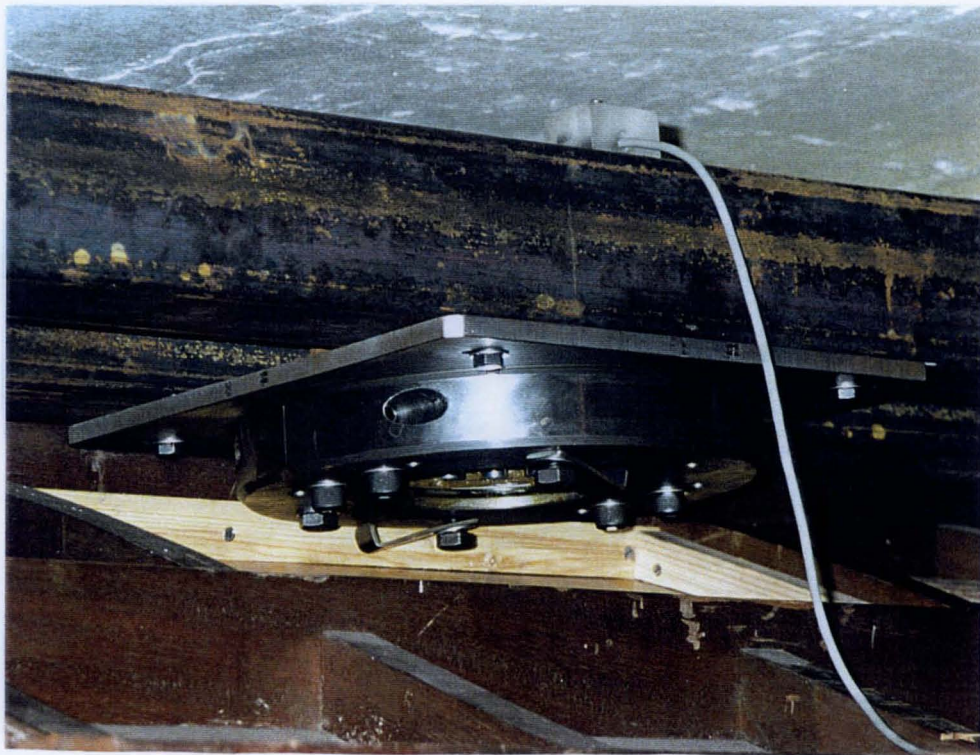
Close-up of upper roller bearing assembly. The two brackets, on the lower face of the bearing housing, hold the upper rotating shaft in place when installation takes place. The rpm sensor location is also evident on the upper surface of the transverse beams.
